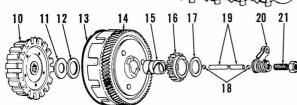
Exploded view of the clutch assembly. Parts (20 & 21) are located in left cover.
